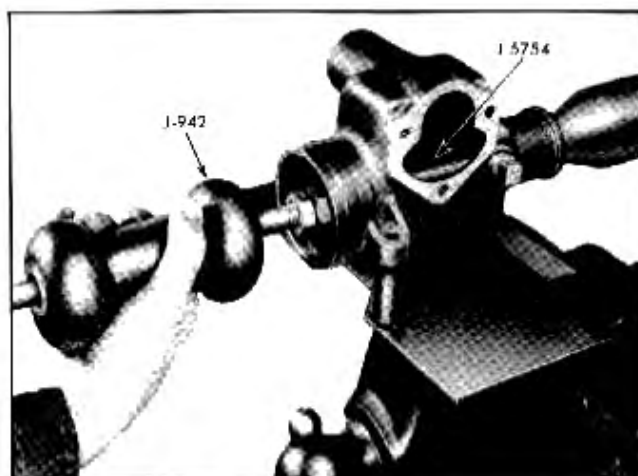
Removing Bearing Cup from Steering Gear Housing
